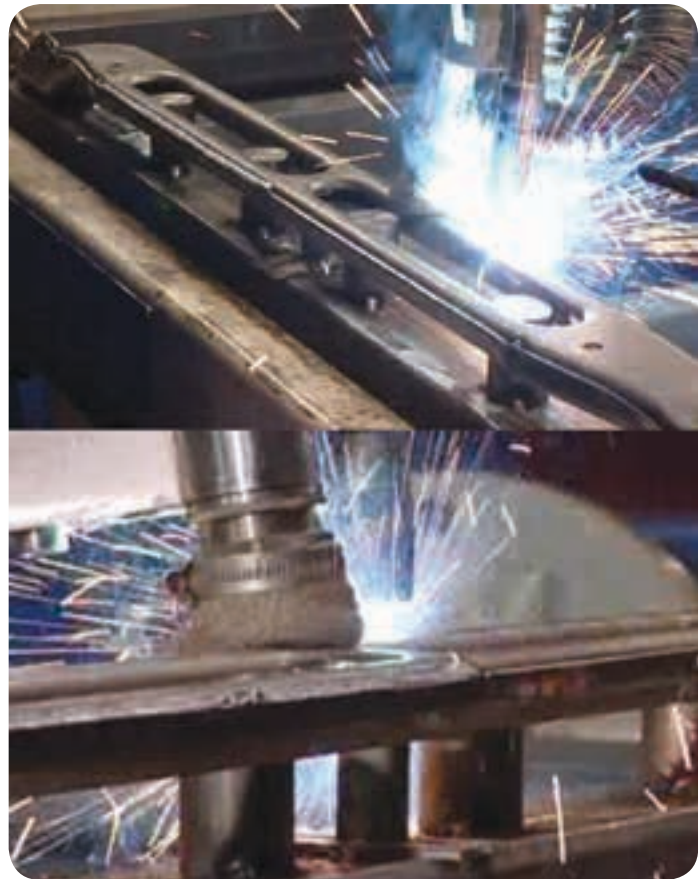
The LSND welding head in position on the axle component during testing of the coolant sealing and the weld path.
